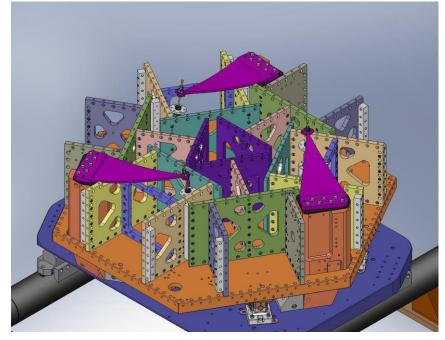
Flexure Assemblies temporarily mounted in all (3) Springs. Next, the Springs will be loaded flat.
